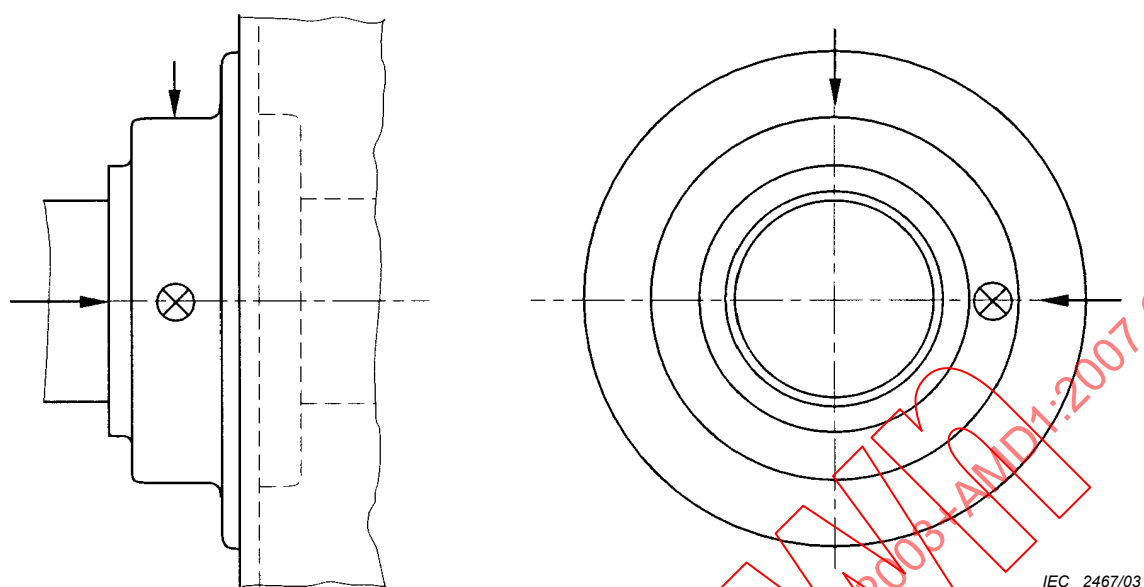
Preferred positions of measurement applicable to one or both ends of the machine
